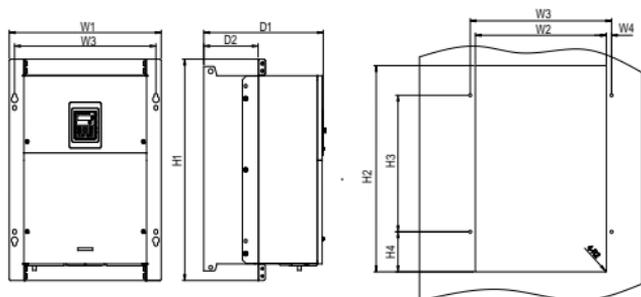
Flange mounting of 3PH 400V 90-110kW inverters
